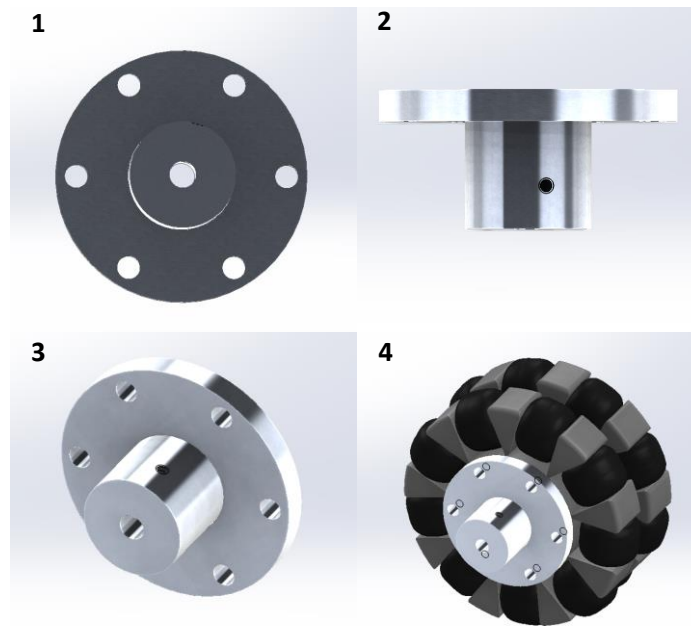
The 3D model for the motor-to-wheel coupler and omnidirectional wheel. 1- front view; 2- side view; 3,4- trimetric view.
